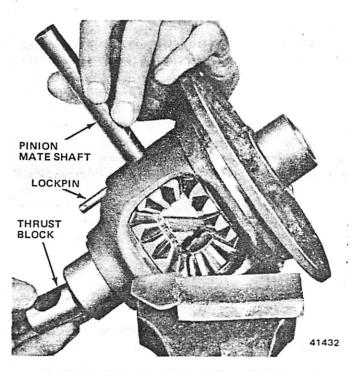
F-34 Pinion Mate Shaft and Thrust Block Removal
